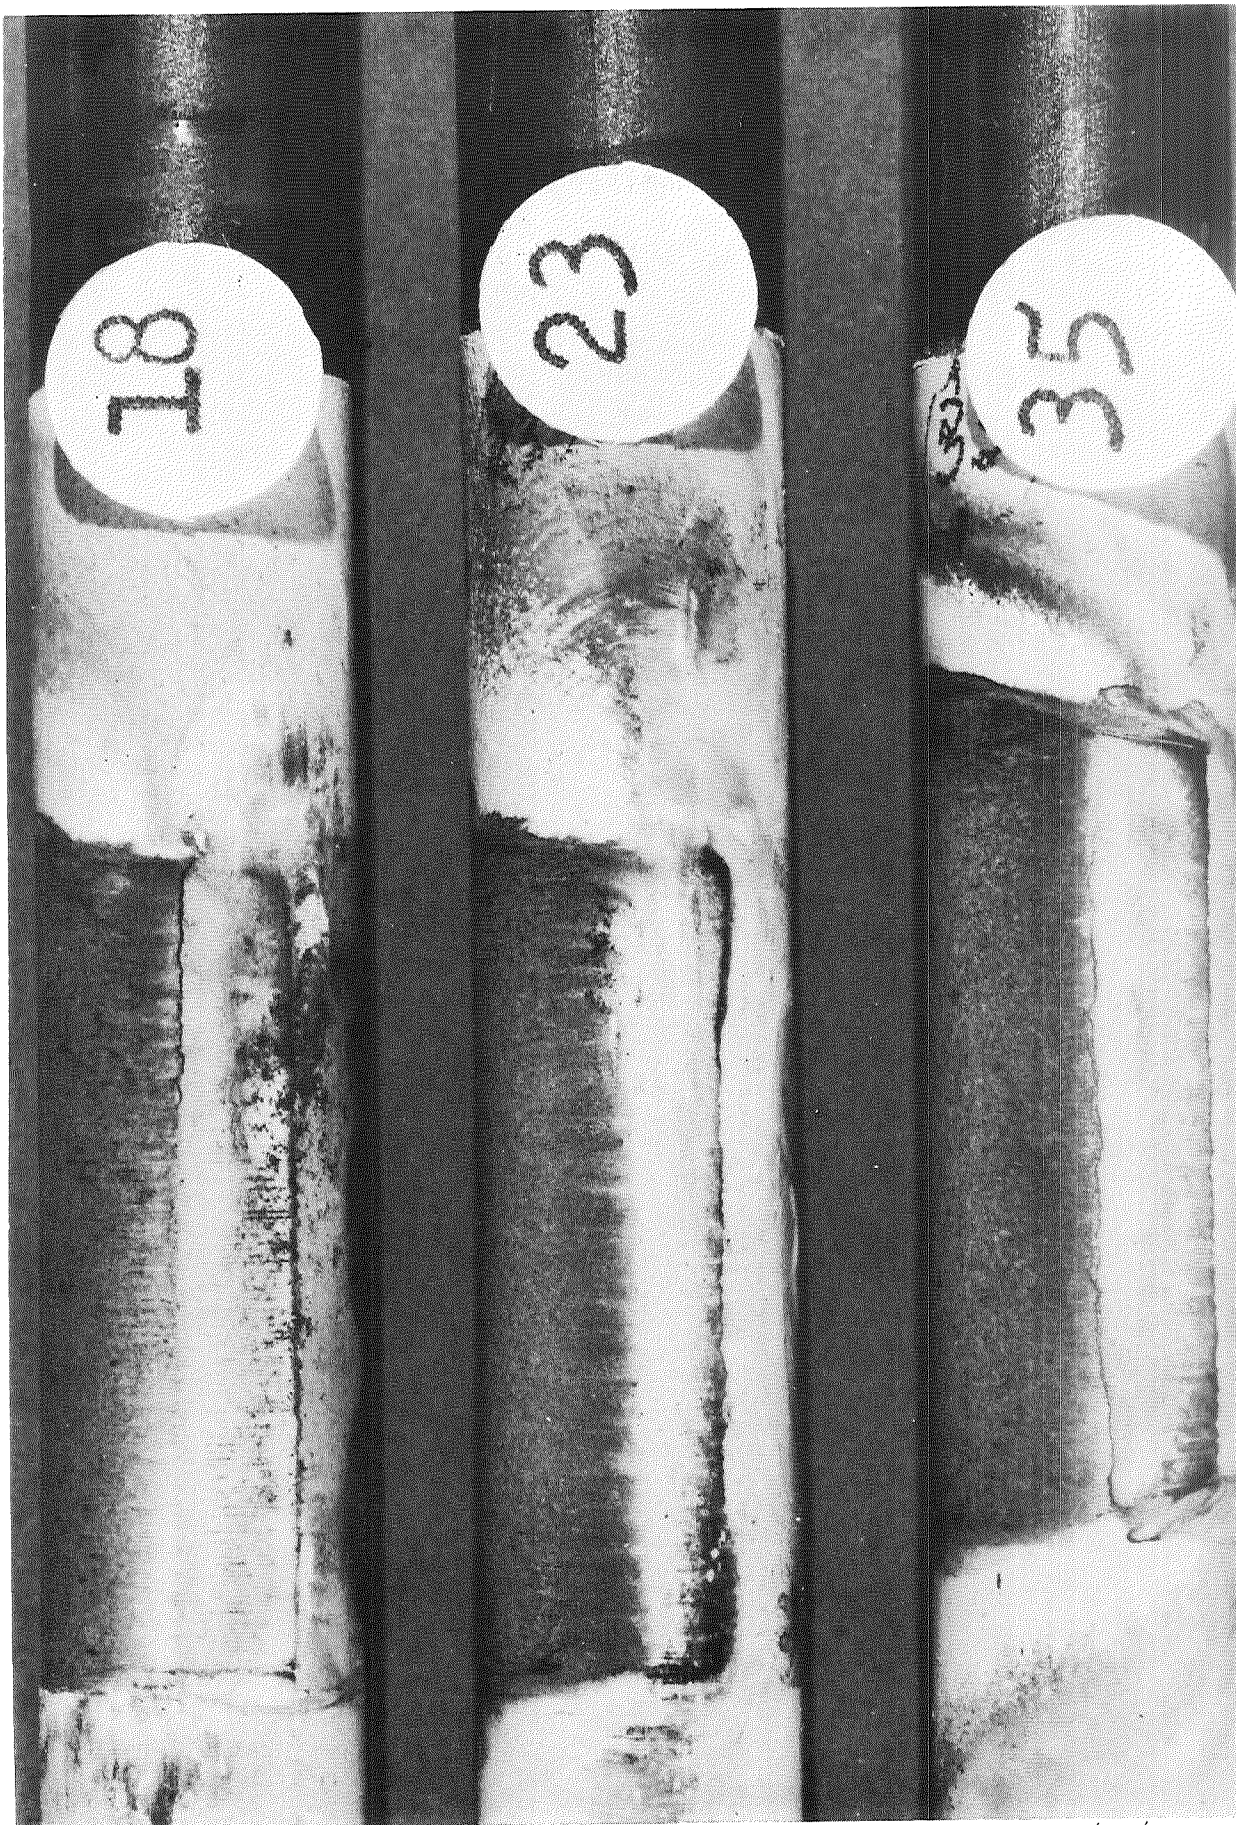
Coated-Tube Specimens After Rocket Engine Test at $P_c = 442$ psia.
